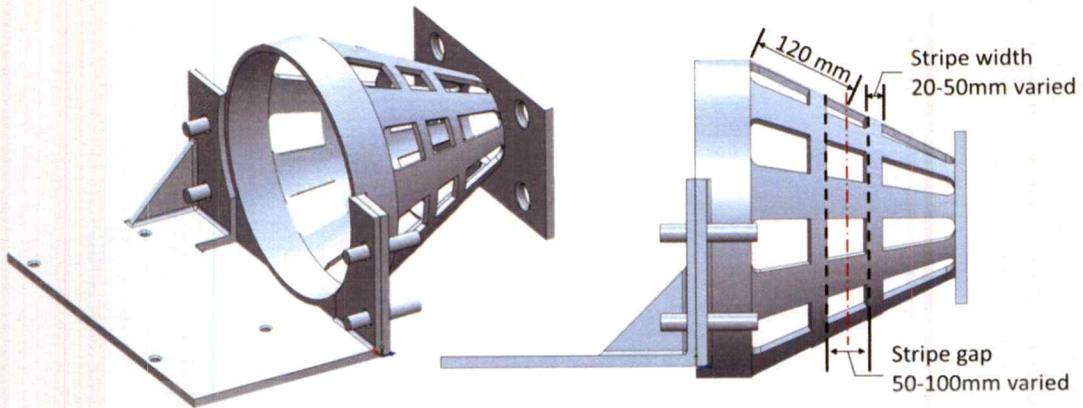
Clutch housing model with strip structure and relevant design parameters (Strip width and Strip gap)
